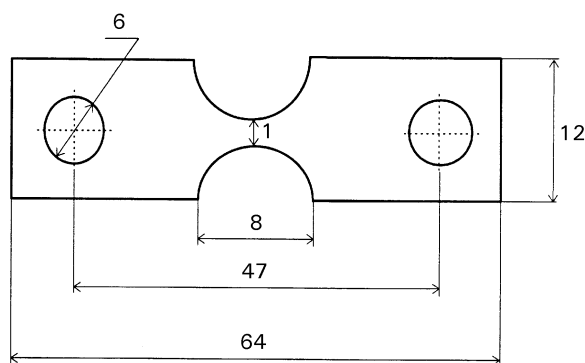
Specimen configuration. Dimensions in mm. Thickness = 1 mm.
